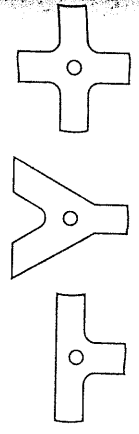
Method of eliminating unsound metal at the center of heavy sections in castings by using cored holes.
